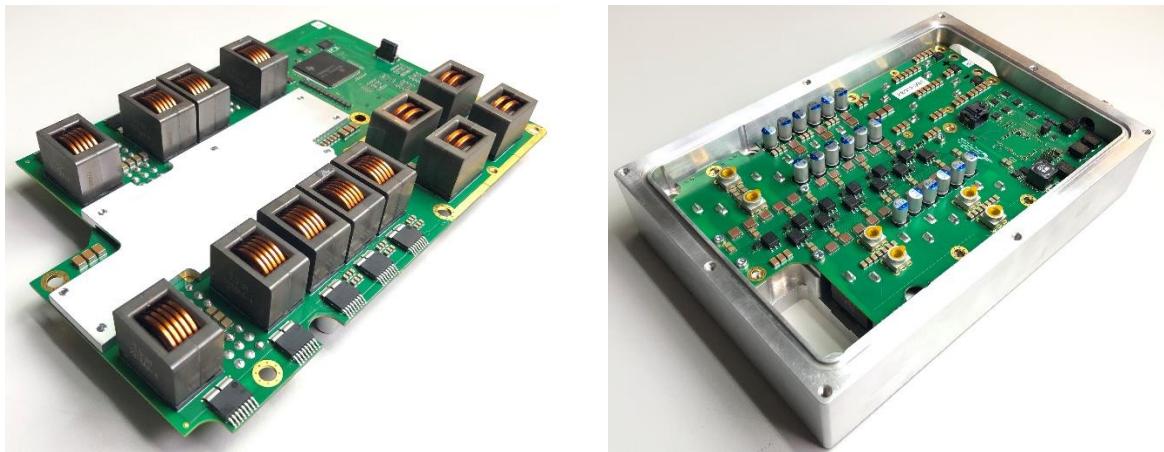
Photographs of the prototype power converter (left: bottom side of power PCB with heat distribution plate; right: top side of power PCB mounted into prototype housing).
